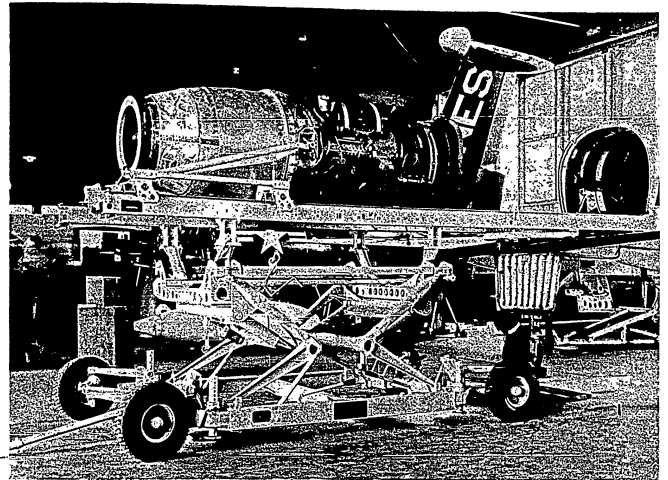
J-65 Engine Removed from Aircraft and Ready for Transfer to Engine Run-U Test Stand or Workstand
